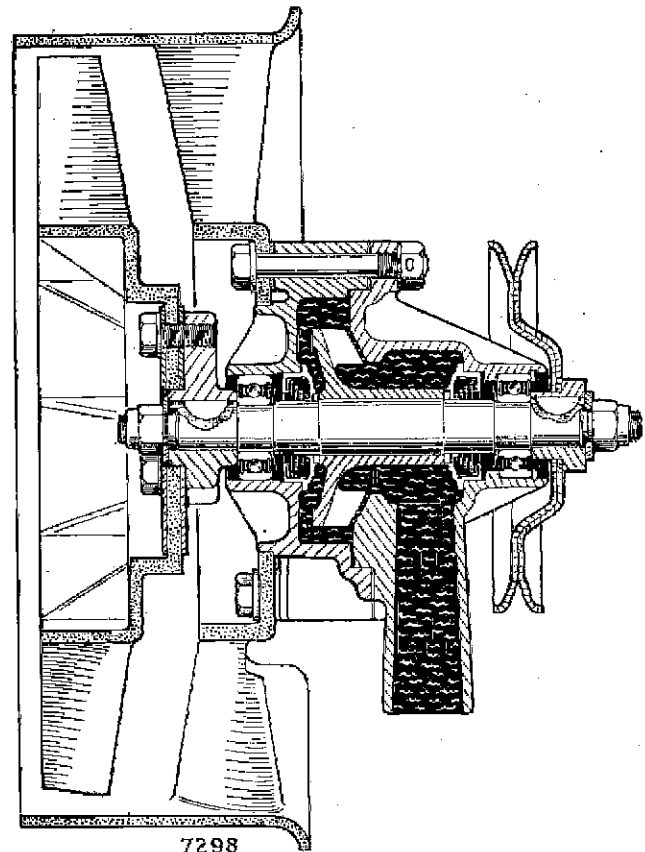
Sectioned view of water pump and fan assembly. (Later models)
